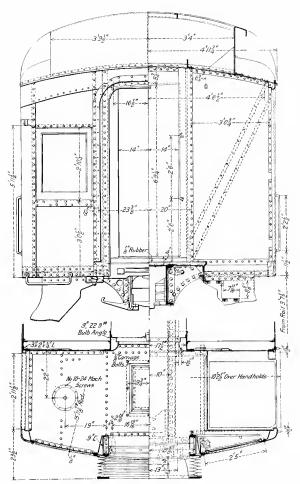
End Construction Used on Pennsylvania Railroad Steel Passenger Train Cars, Classes P70 and PB70.
